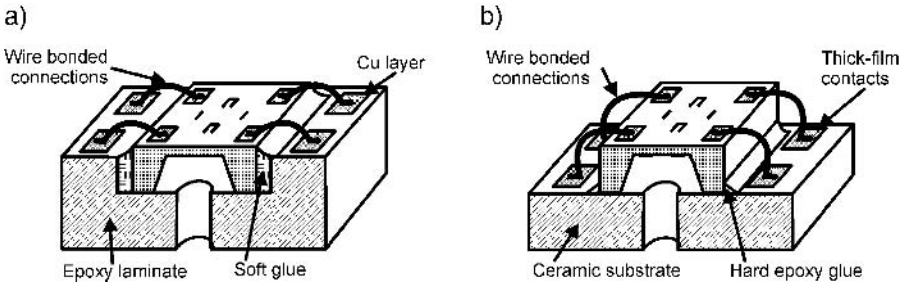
Substitute methods of assembling of pressure sensor structures: a) using flexible gel glue, b) edge assembling.
